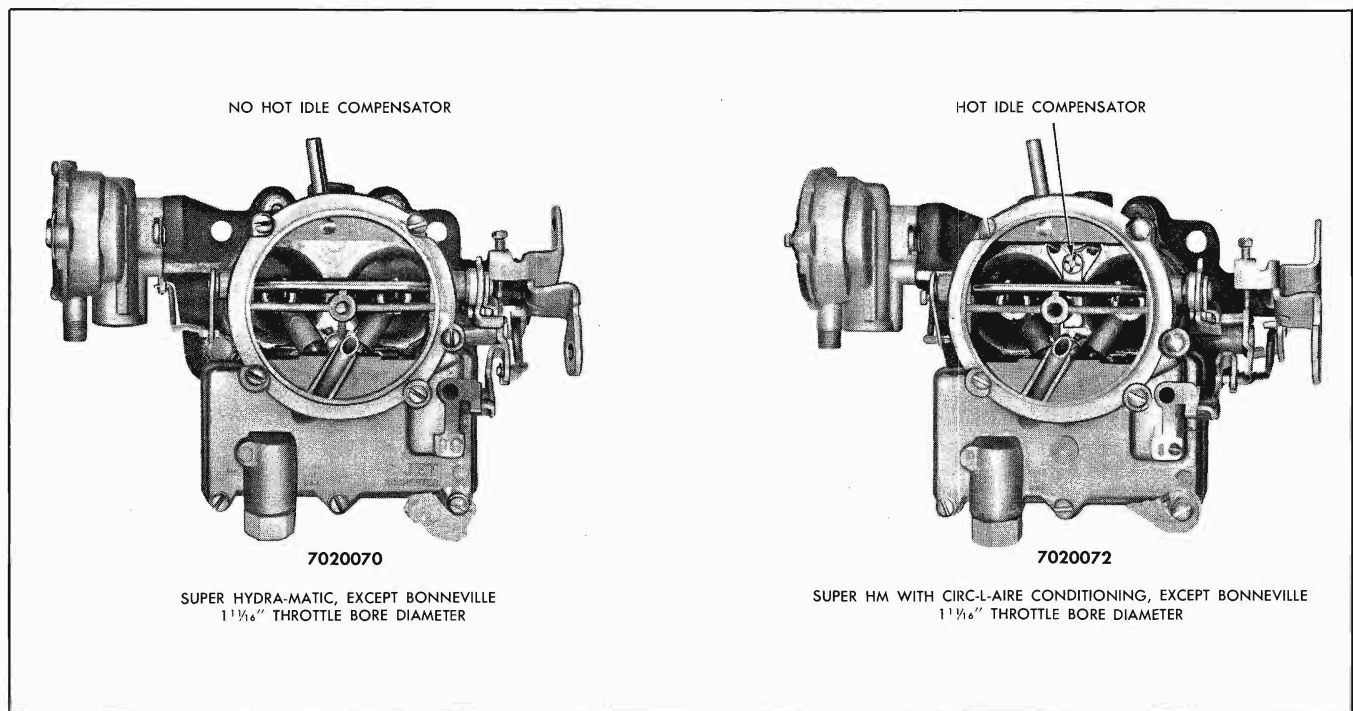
B-56 Comparison of 7020070 and 7020072 Carburetors Showing Hot Idle Compensator Which is Internal. Calibration Specifications Same for Both Carburetors
